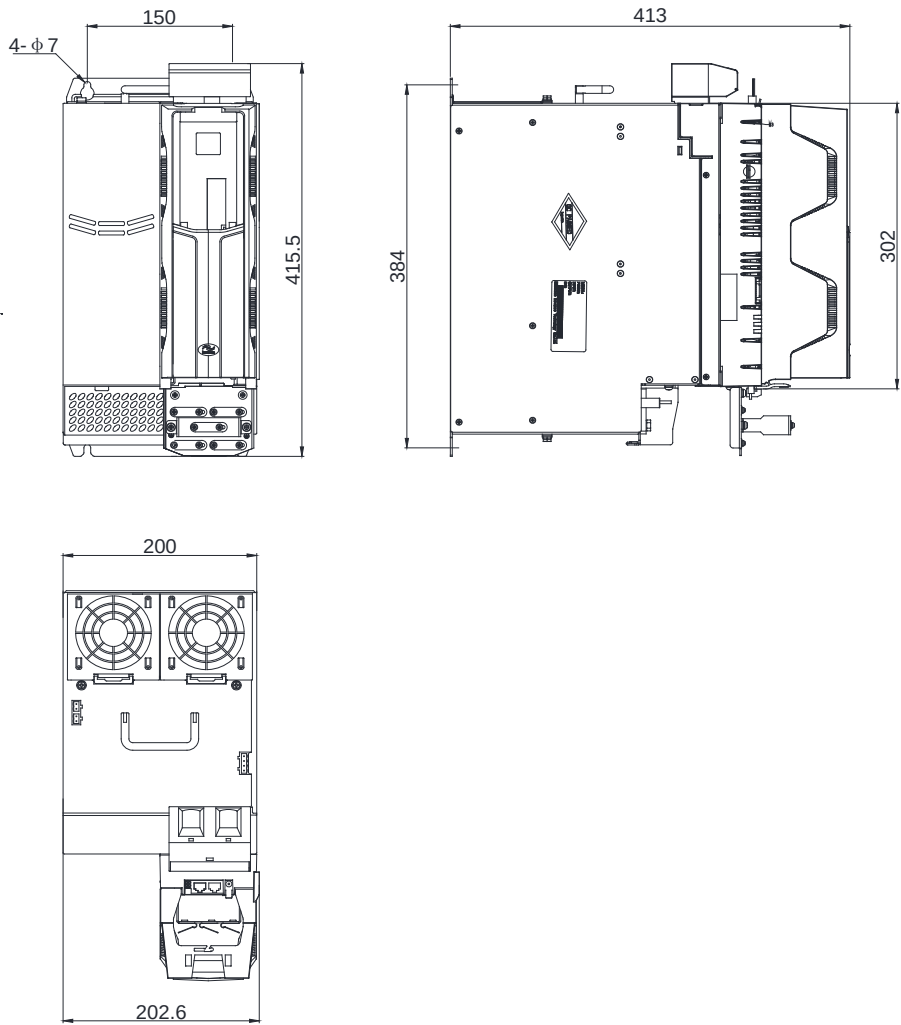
Dimensions of Size H4 Inverter (mm)
